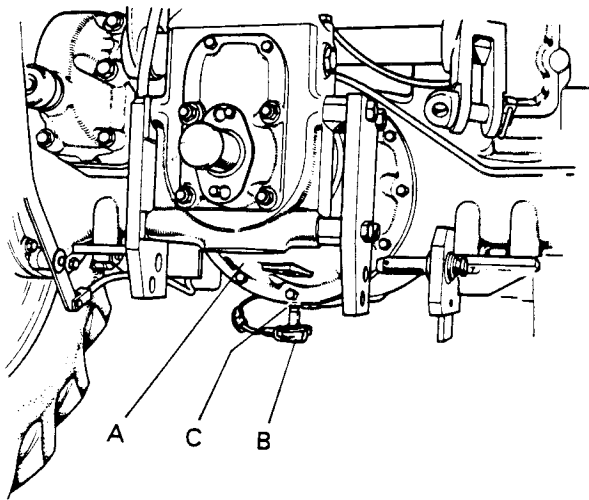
REMOVING OIL FILTER SWITCH ADAPTOR
